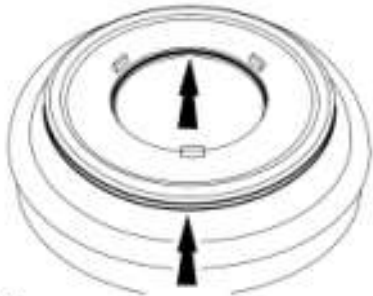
Locating Inner And Outer Piston O-Ring Seals
